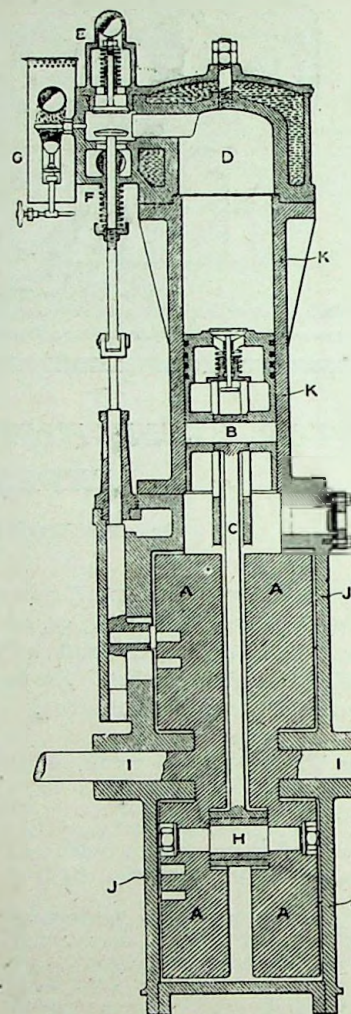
FIG. III. A SECTION OF ONE OF DAIMLER'S ENGINES 1880-5.
